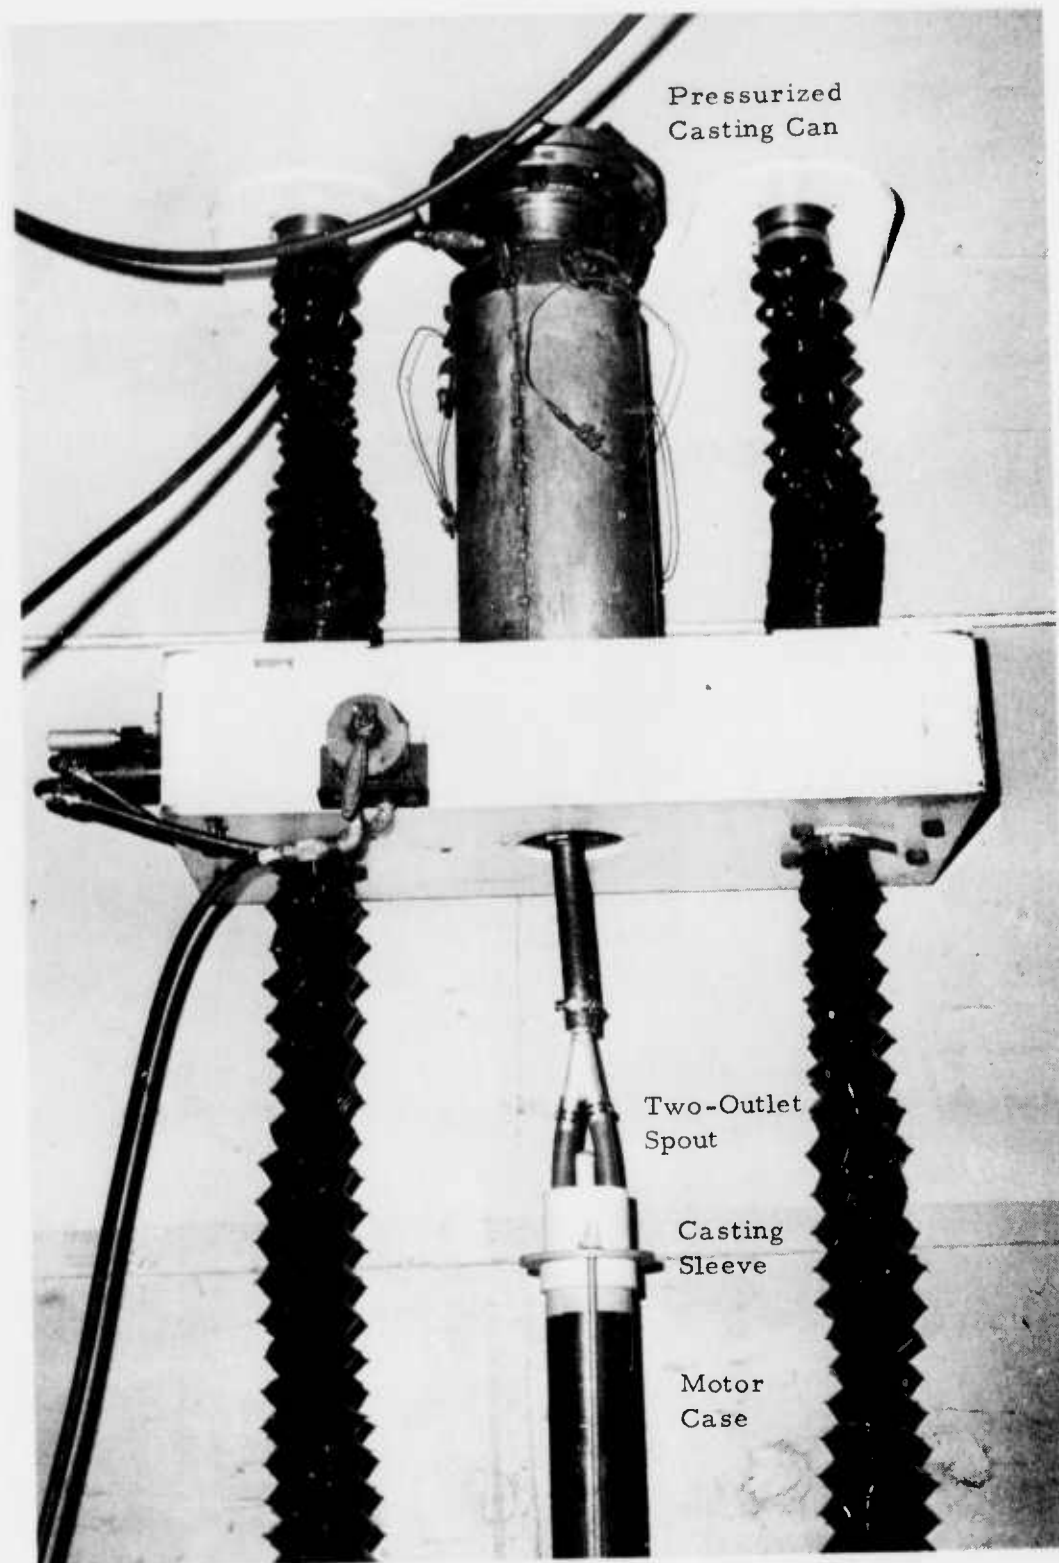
Pour-Casting Set-Up for TX-631 Motor
